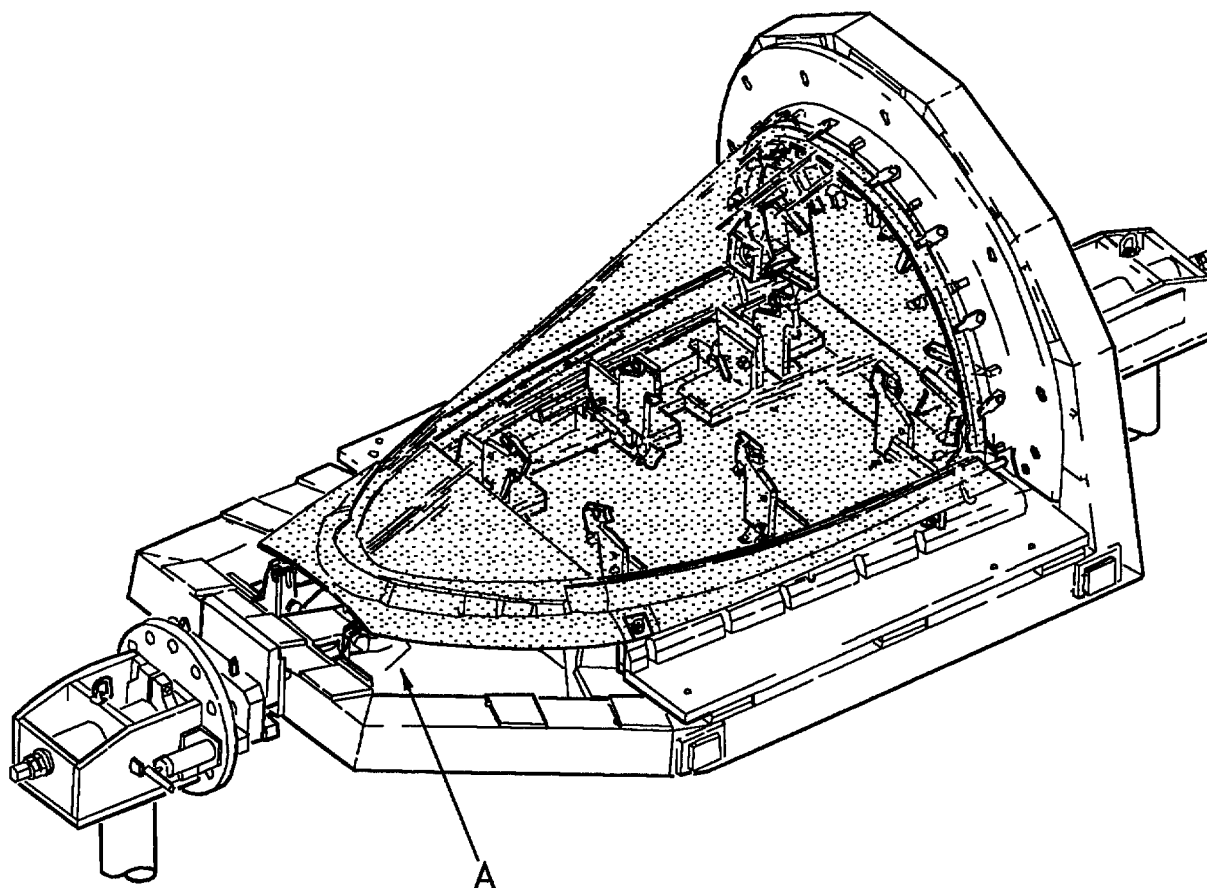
Inspection or Replacement - Hinge (Sheet 1)
